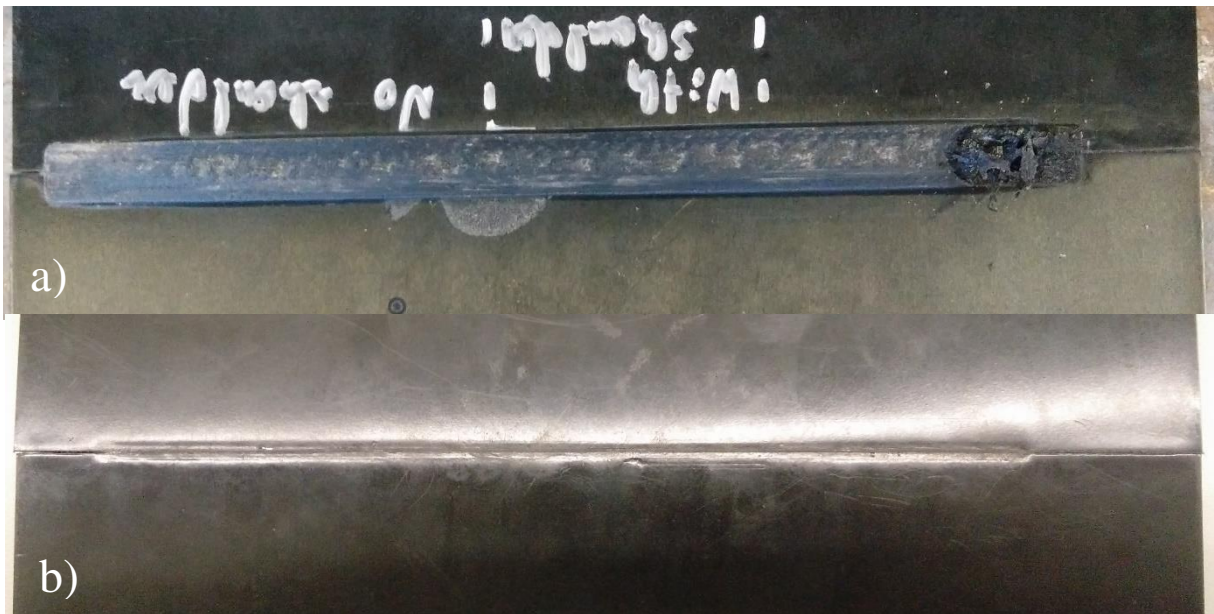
Weld from PEEK stationary tool second attempt, a) top view, b) bottom view.
